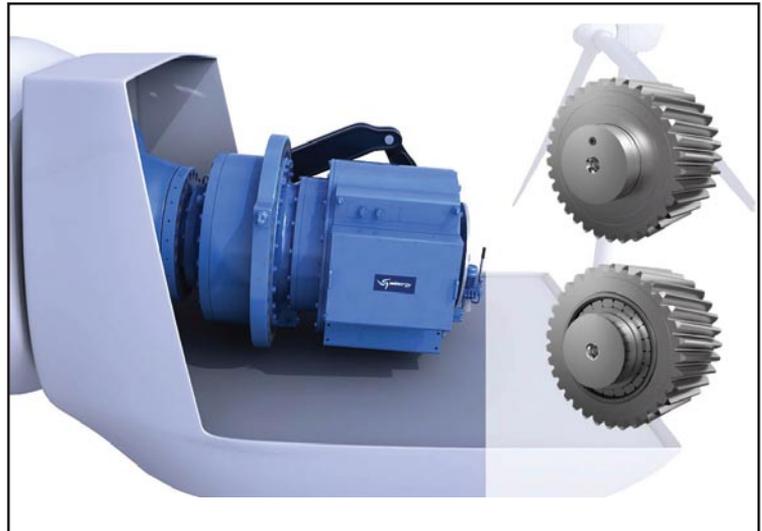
Design allows both for journal bearings or rolling element bearings.
